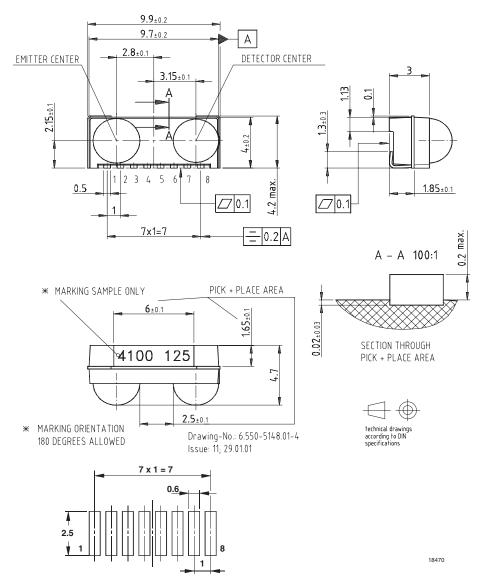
Package Drawing TFDU4101. Tolerance ± 0.2 mm if not otherwise mentioned
